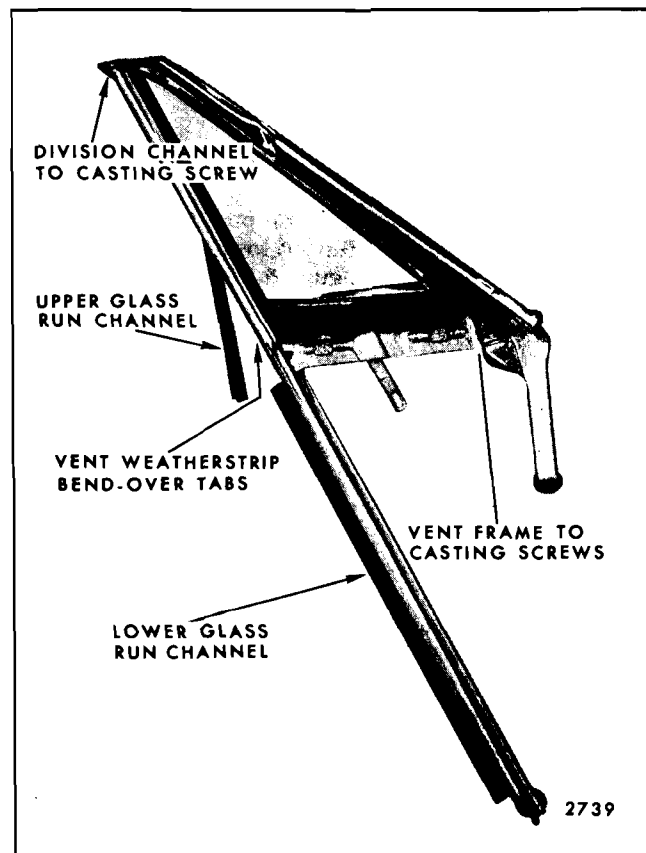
Front Door Ventilator Assembly - "A-39" Styles
